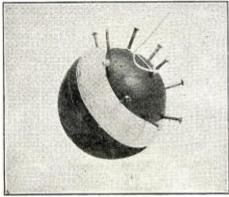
Showing the Rubber Ball With the First Section of the Rotor Winding In Place.
